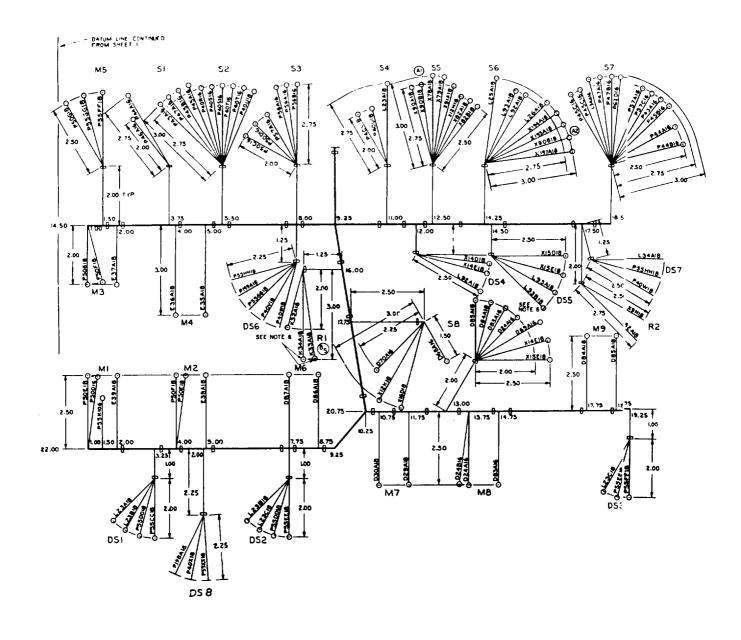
Control Cubicle Wiring Harness (Sheet 6 of 6) Drawing No. 69-677
